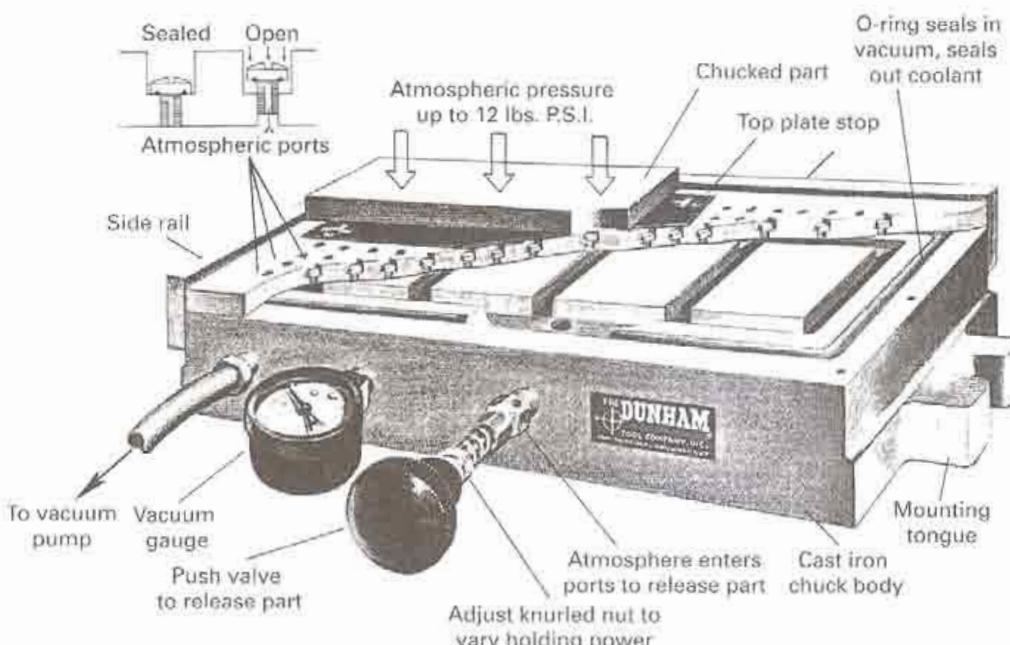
Cutaway view of a vacuum chuck. (Courtesy of Dunham Tool Company, Inc.)
